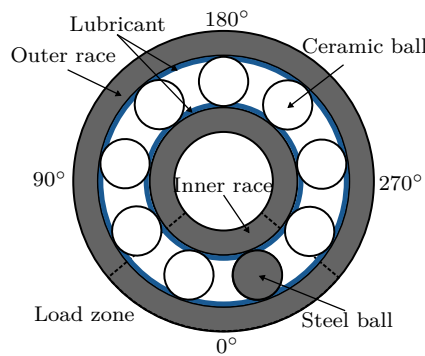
Hybrid bearing with one steel ball for single ball-to-raceways capacitance measurements
